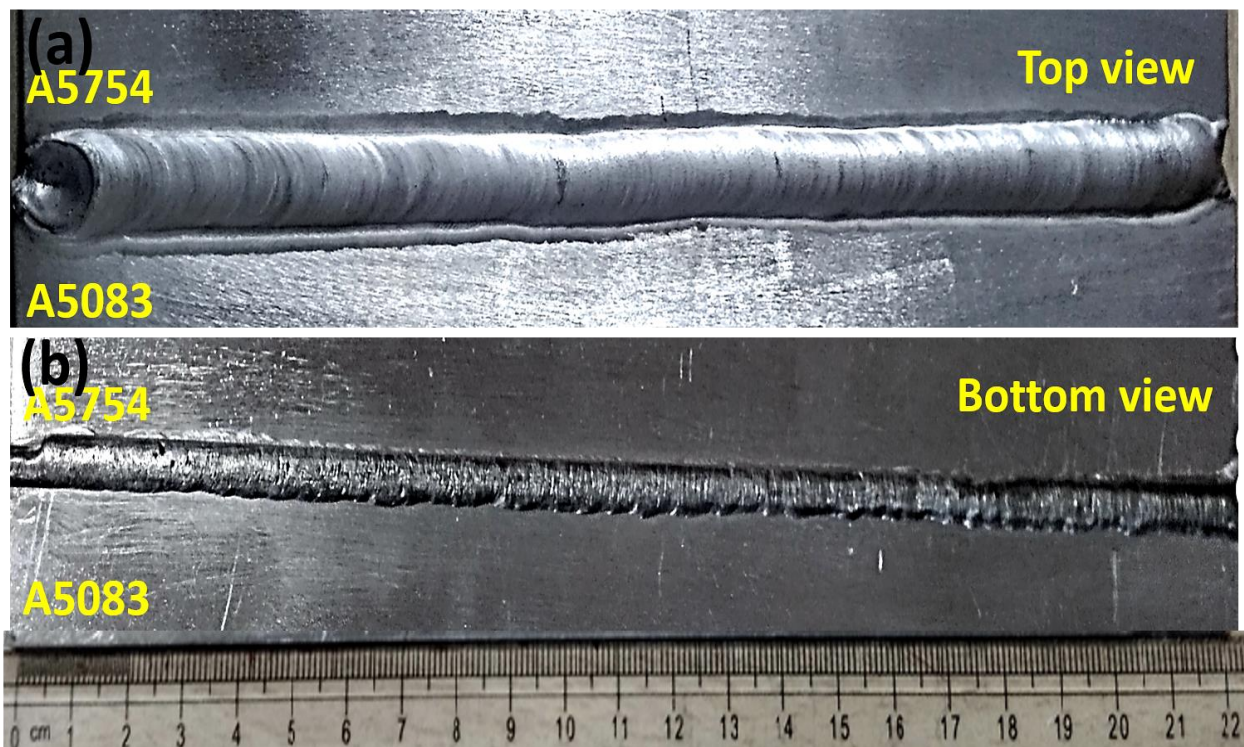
Surface appearance of the TIG welded A5754-H111 and A5083-H111 joint using
